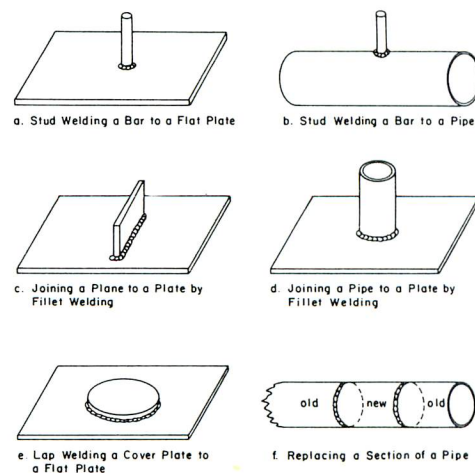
Several basic types of joints will be studied for welding by instamatic systems.
